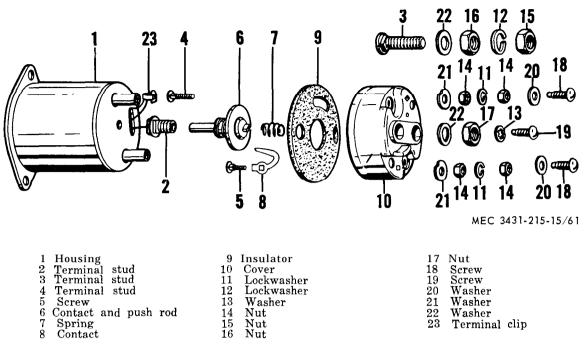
Starter, assembly and disasembly (Model LEB 300).
